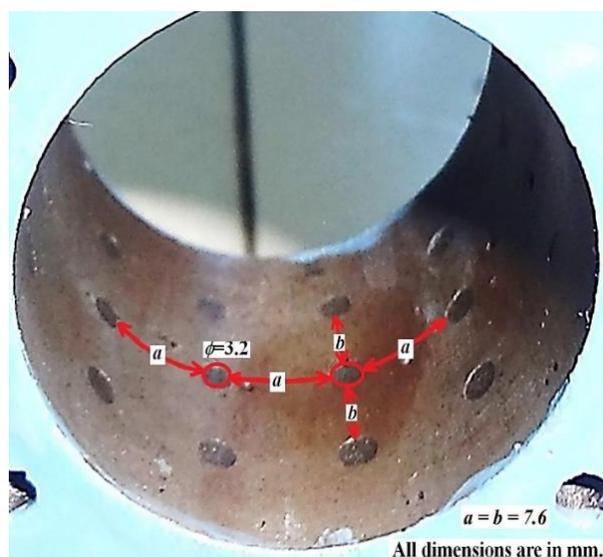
Enlarged photographic view of the inside surface of a textured test bearing's bore.
